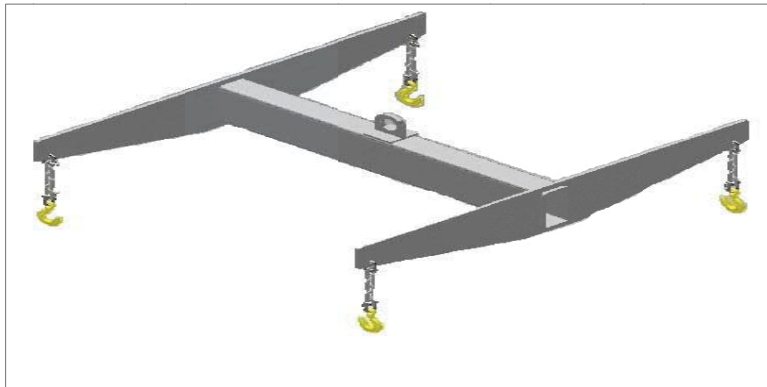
Ovivo Universal Mounting Kit Lifting Tool
